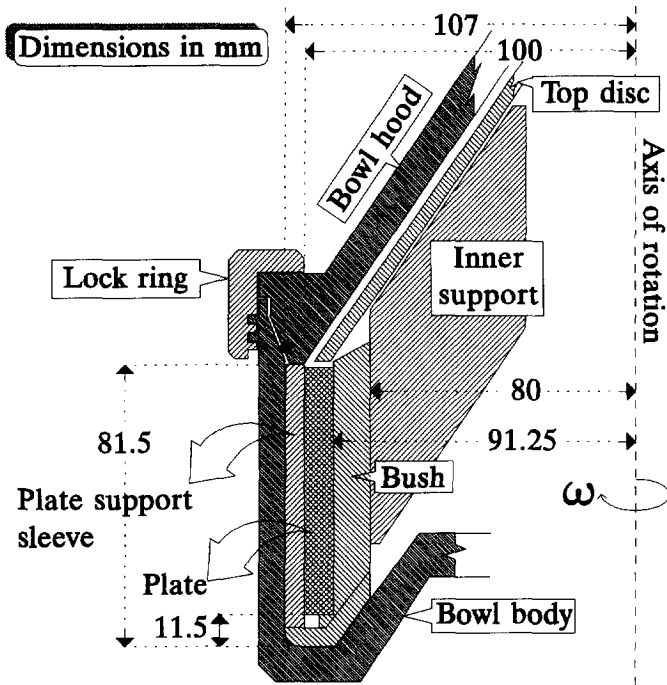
Part of a cross-section of the experimental PPC, showing how the plate pack fits within the bowl of the centrifuge.
